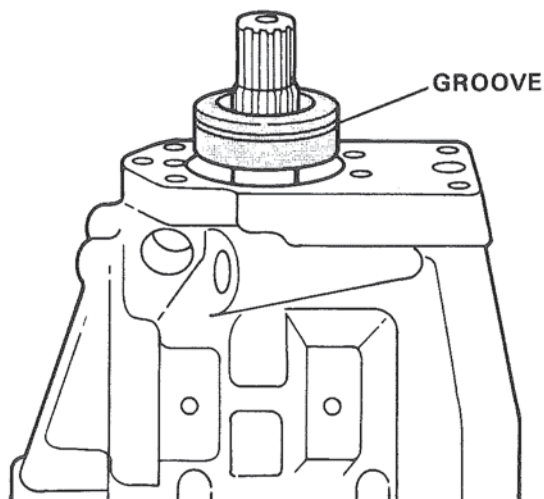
Output Shaft Bearing Properly Positioned for Assembly.
